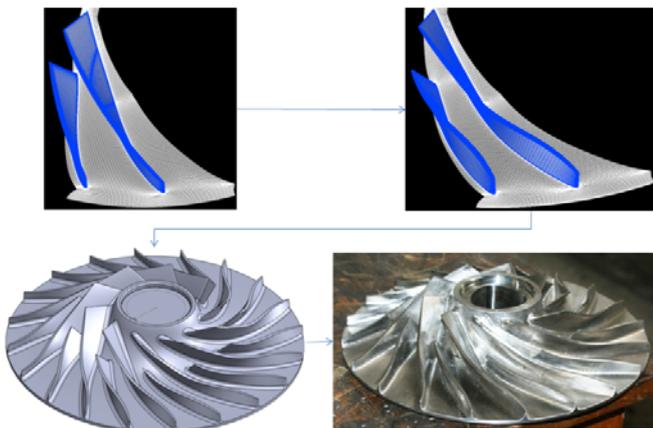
The baseline (V15) and optimized (V25) rotor mesh (top), V25 CAD and finished part (bottom)
